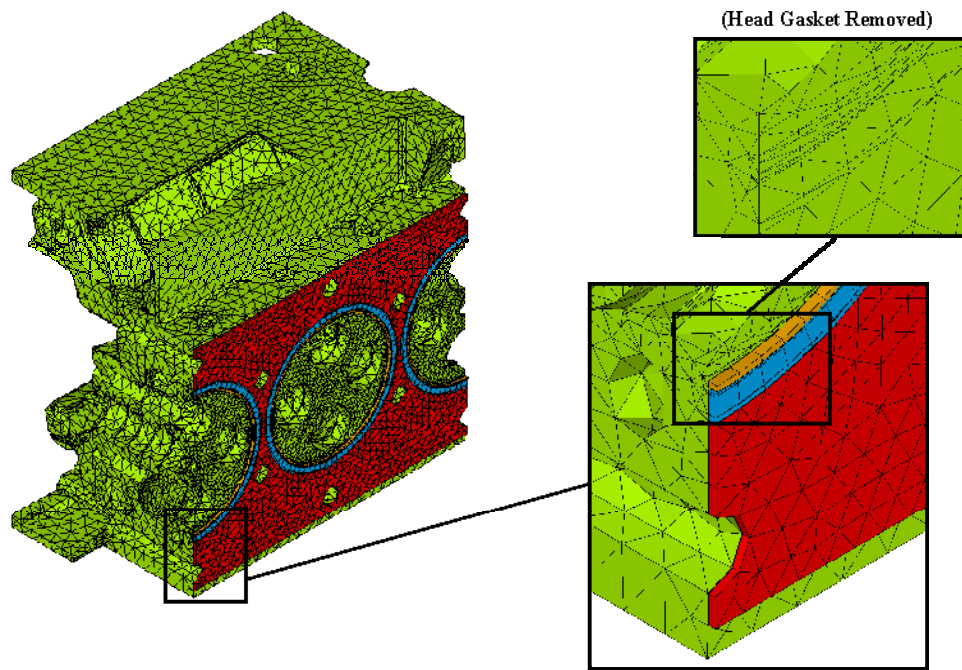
Isometric View showing Cylinder Head and Head Gasket
